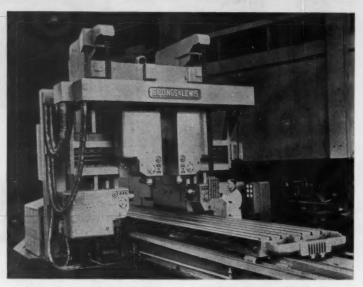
Large planer-miller, with four 10-inch diameter quills, to be exhibited by Giddings & Lewis Machine Tool Co.
